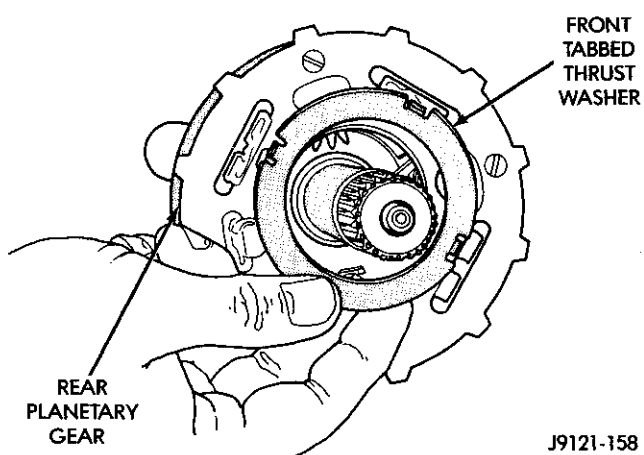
Assembling Rear Annulus And Planetary Gear
